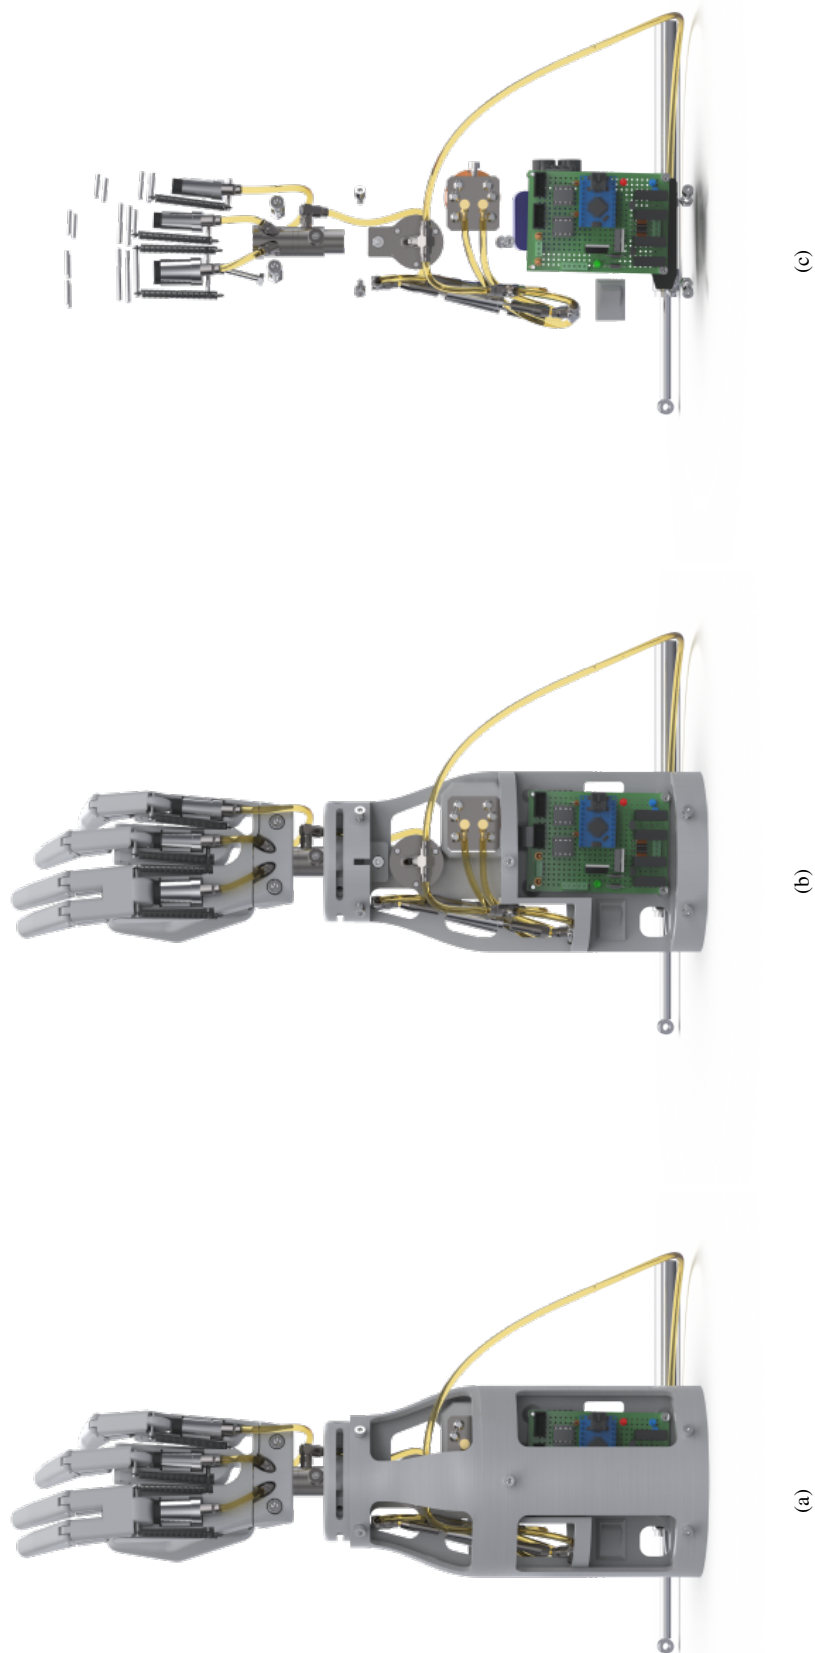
(a) Back side with outside shells (b) Back side without shells (c) Back side of nonstructural components
